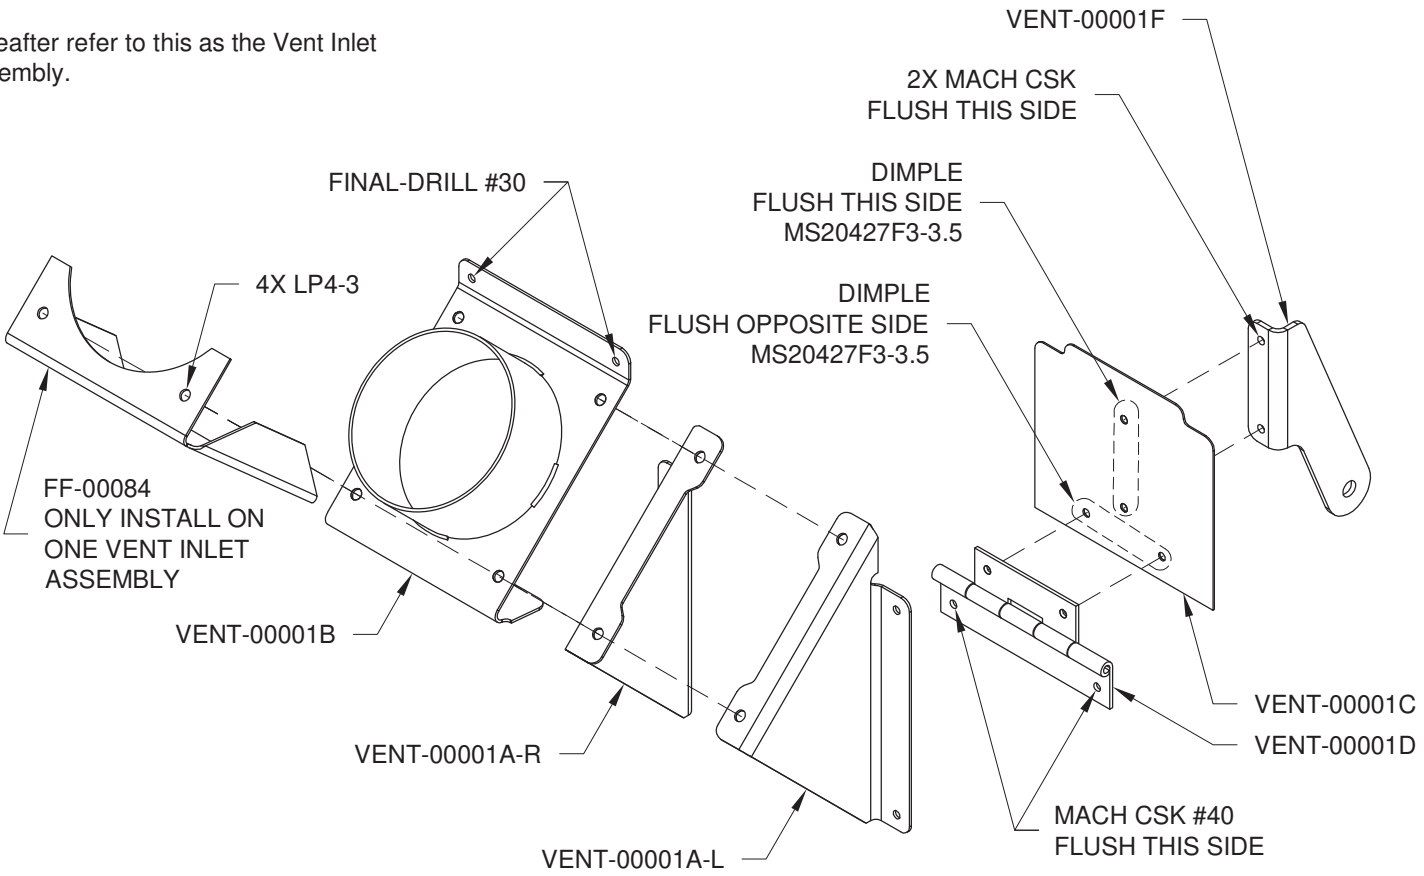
VENT DOOR ASSEMBLY AND VENT INLET ASSEMBLY
